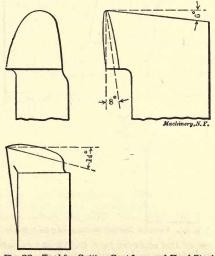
Tool for Cutting Cast Iron and Hard Steel
